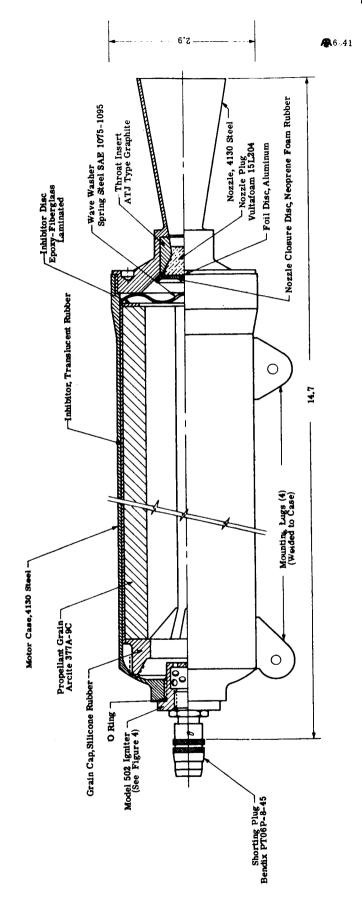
Cutaway View of MARC 7G1 Rocket Motor Assembly.
